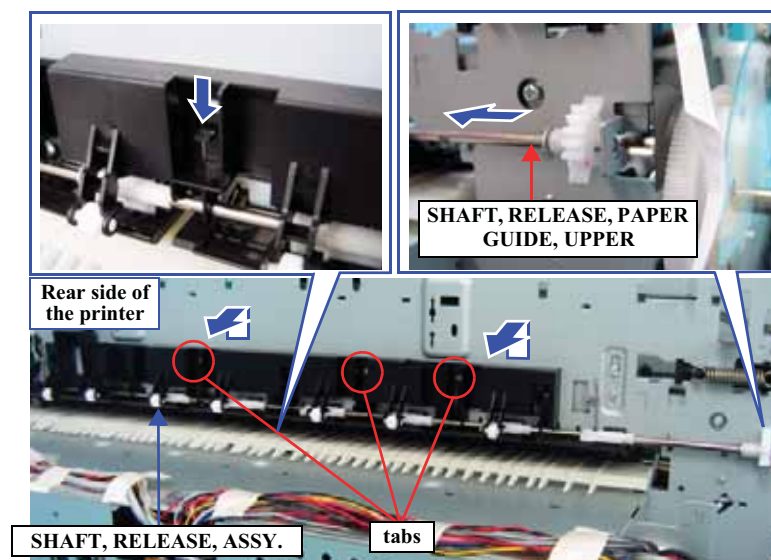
Removing the SHAFT, RELEASE, ASSY.
